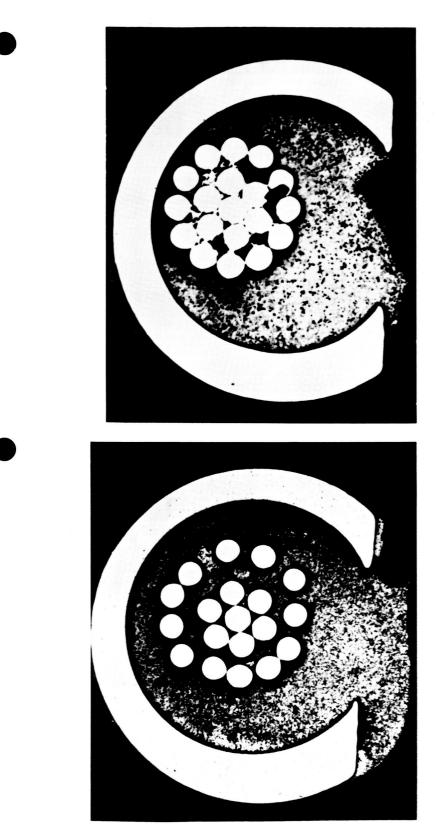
Solder joint 1.1.2.83; stranded conductor to Bendix connector cup; not sterilized; 60x magnification; potassium dichromate etch (02346).
